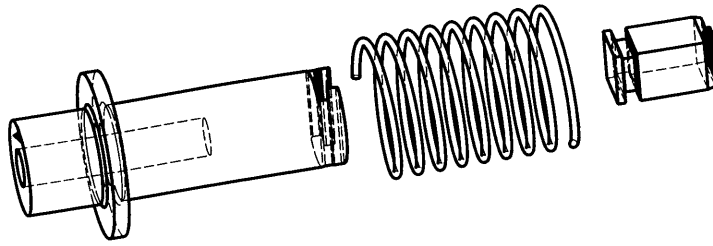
The ‘T’ shaped mushroom on the array interlocks with a mating slot on the strike pin. A spring slides over the assembly. See Appendix B-3 for more drawings.
